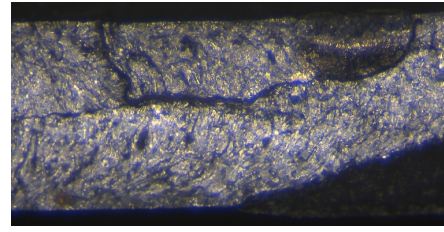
Microscopic photo of fatigue crack surface.
